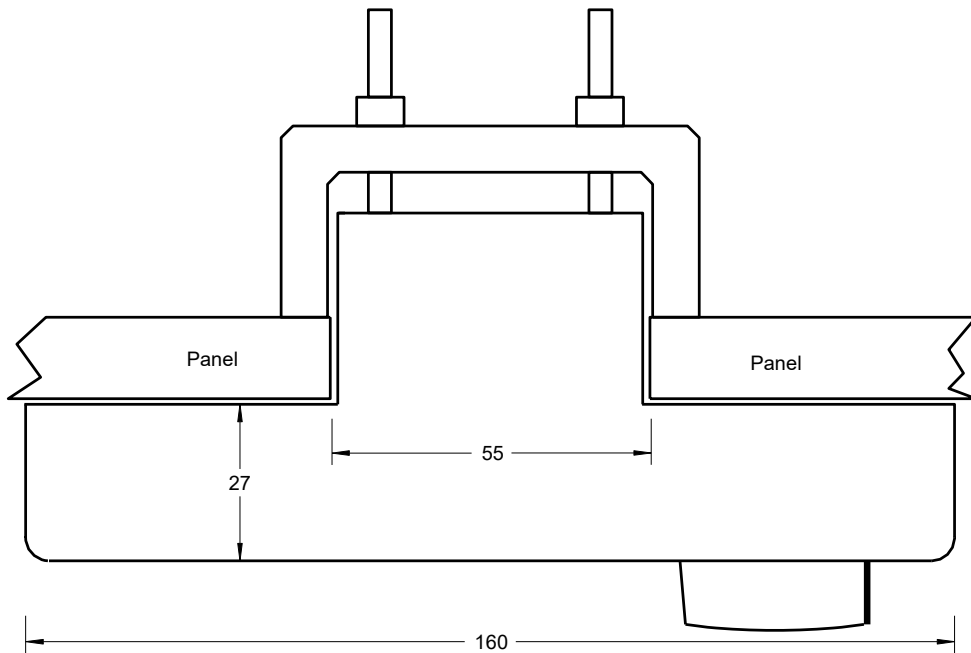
Panel mounting of the SW AP05 Control Head.
